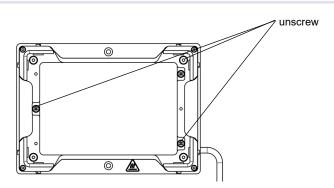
Flat bottom adapter screwed to Teleshake 95 device
